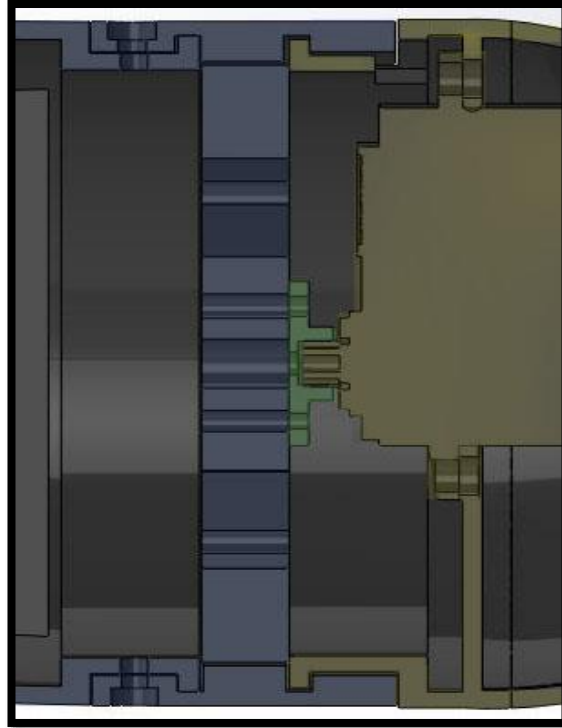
Apparatus and the Disc for the Forearm Yaw Bearing Mechanism
